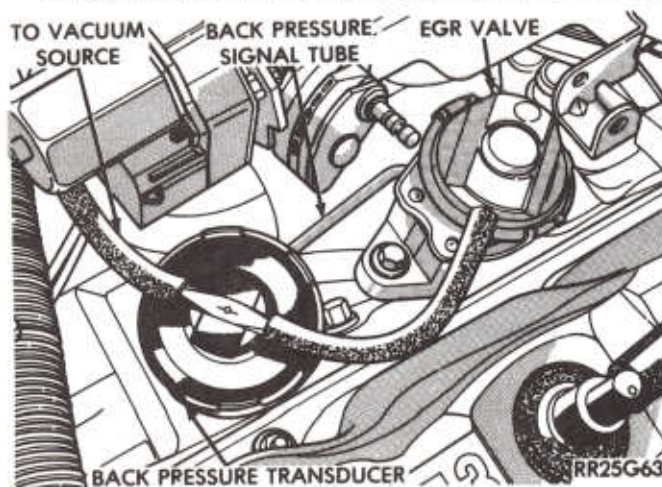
EGR Valve Mounting 3.9L and 5.2L Engines
